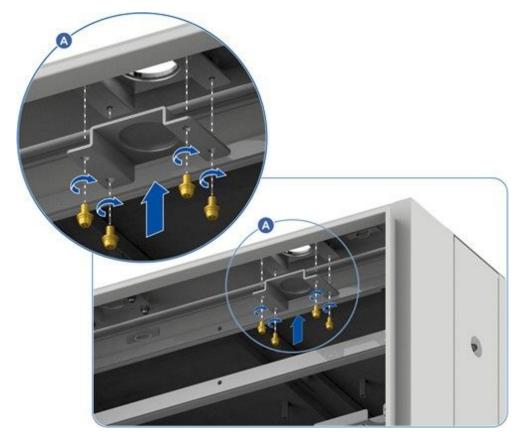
Securing the Cable-Through Components of the Lower-Layer Cabinet
